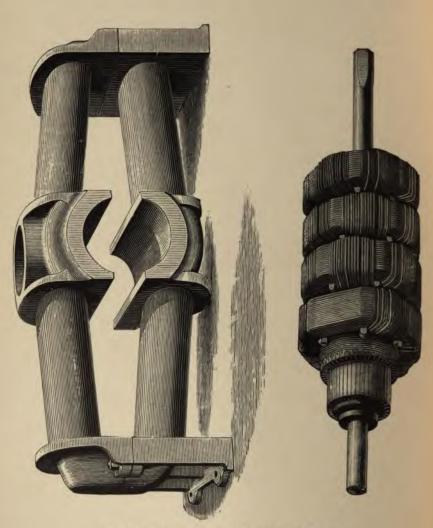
PLATE XX .- THE CROMPTON-BURGIN DYNAMO MACHINE.
